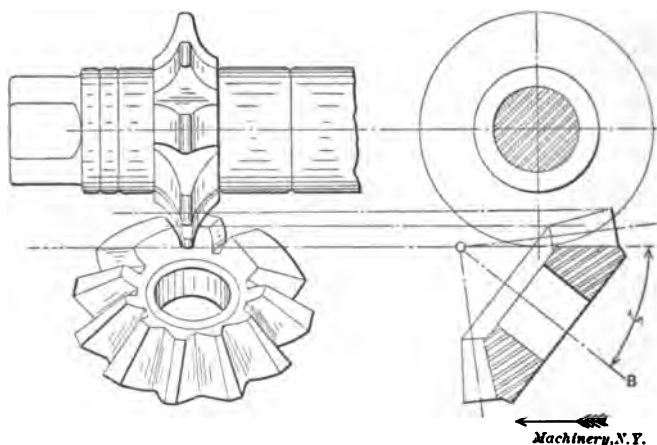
Shaping the Teeth of a Bevel Gear by the Formed Cutter Process
